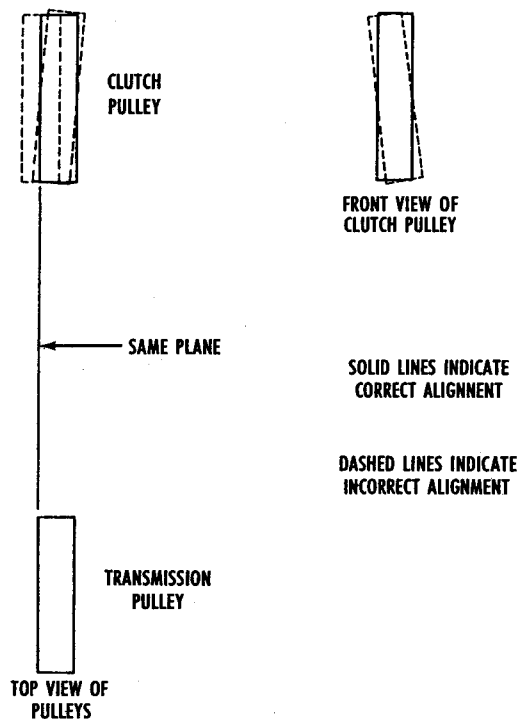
SKETCH OF PULLEY ALIGNMENT
